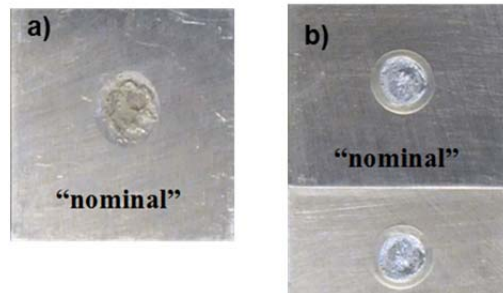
(a) An RSW'ed specimen prior to quasi-static tensile testing, and (b) subsequent fractured specimen after the quasi-static tensile test.
